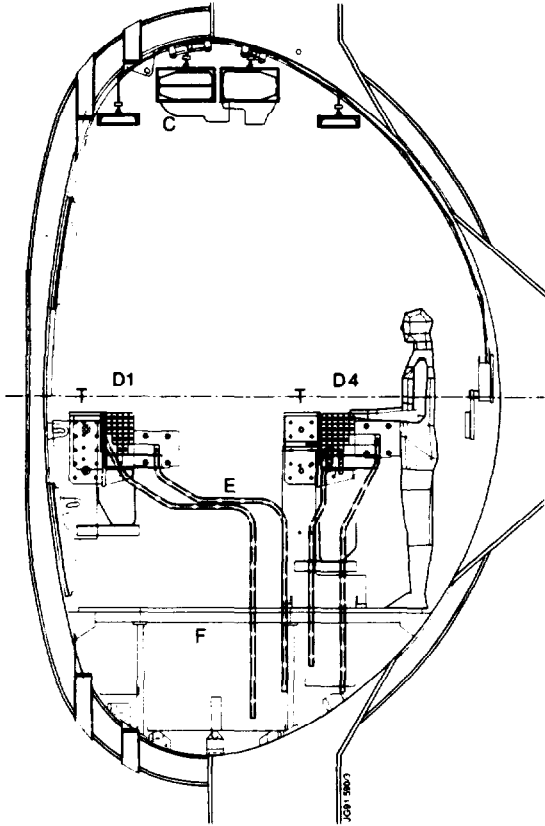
Assembly of coils 1 and 4 (D1, D4) showing assembly tables (T), temporary floor (F), electrical terminals (E) and cases for coils 2 and 3 (C).
